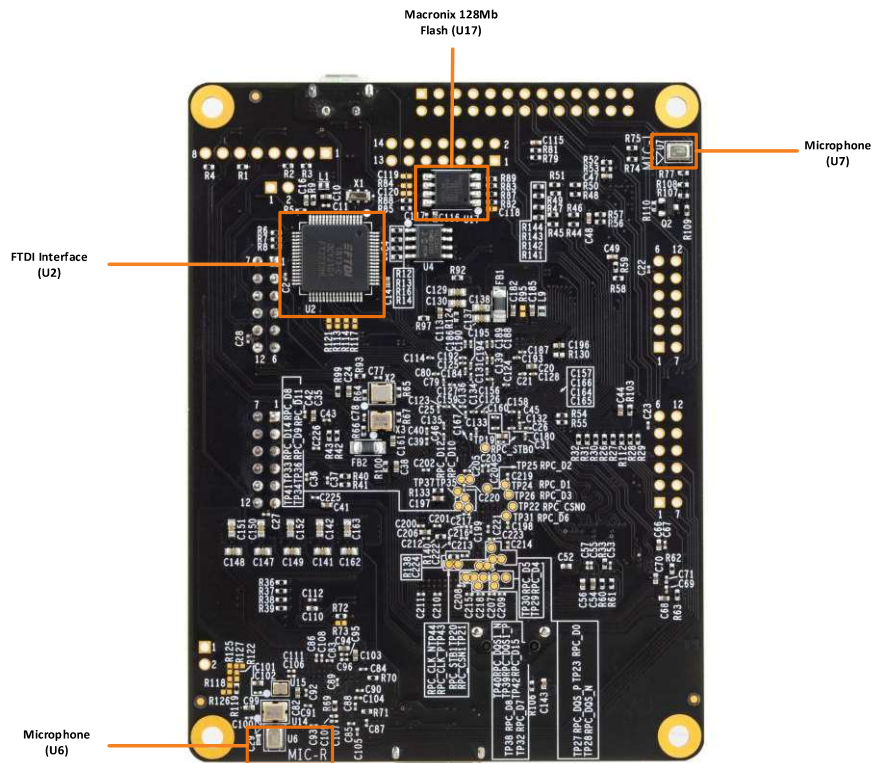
Bottom View of CertusPro-NX Voice and Vision Machine Learning Board
